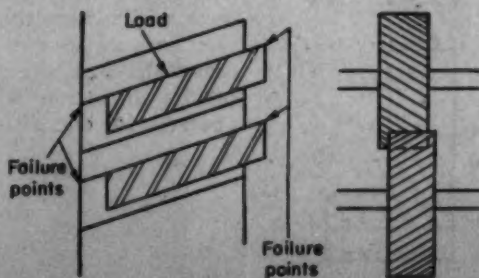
Below—The need to crown helical gear teeth may sometimes be avoided simply by mounting the gears in a slightly "staggered" position endwise. This keeps the load away from the thin tooth ends
